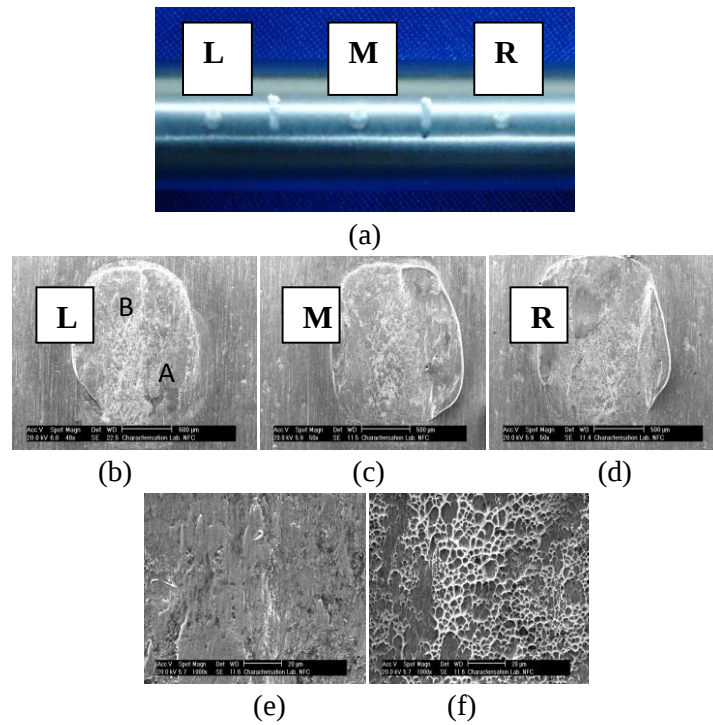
(a) Fractured surface of bearing pad weld; (b),(c),(d) Fractured projection at 50x magnification (location L, M and R); (e) Location A in fig b at 1000x; (f) Location B in fig b at 1000x magnification
